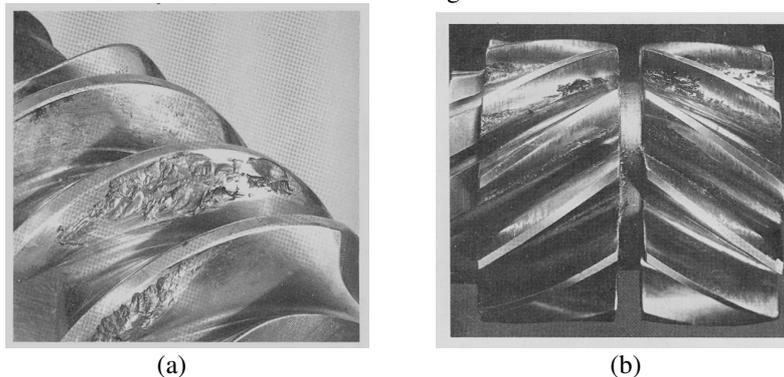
Whole Tooth is Destroyed by Extensive Pitting
